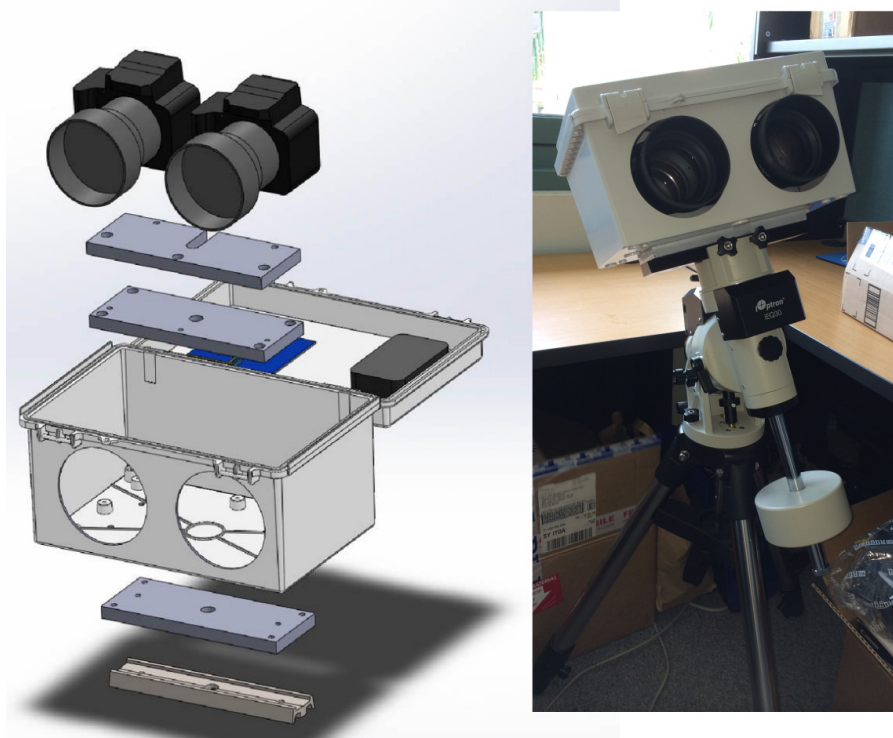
PANOPTES baseline unit design. Left: Camera housing design. Right: Assembled unit.
